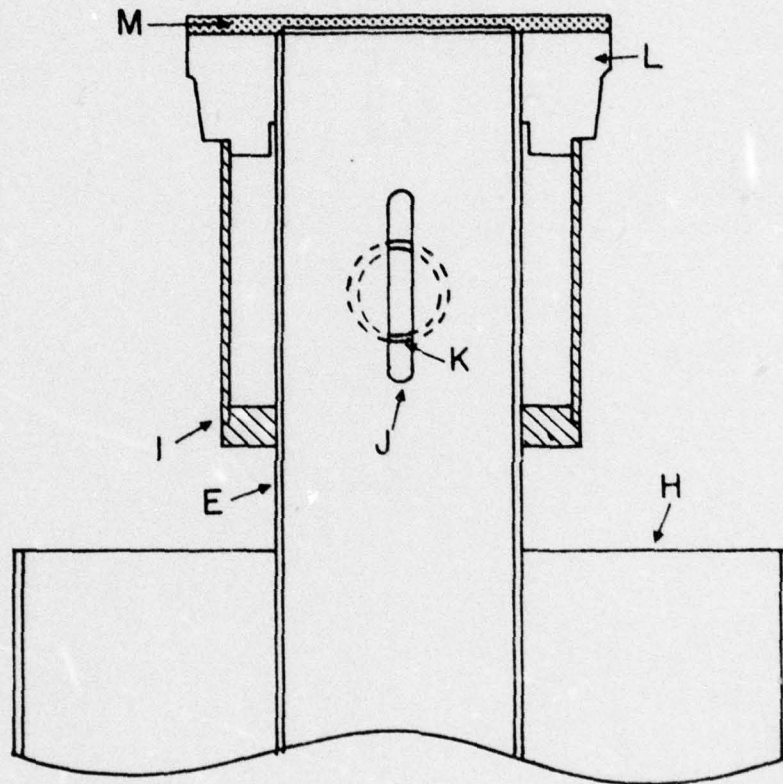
Top portion of the cavity assembly showing the top of the dewar, the upper vacuum seal, and the pumping manifold.
